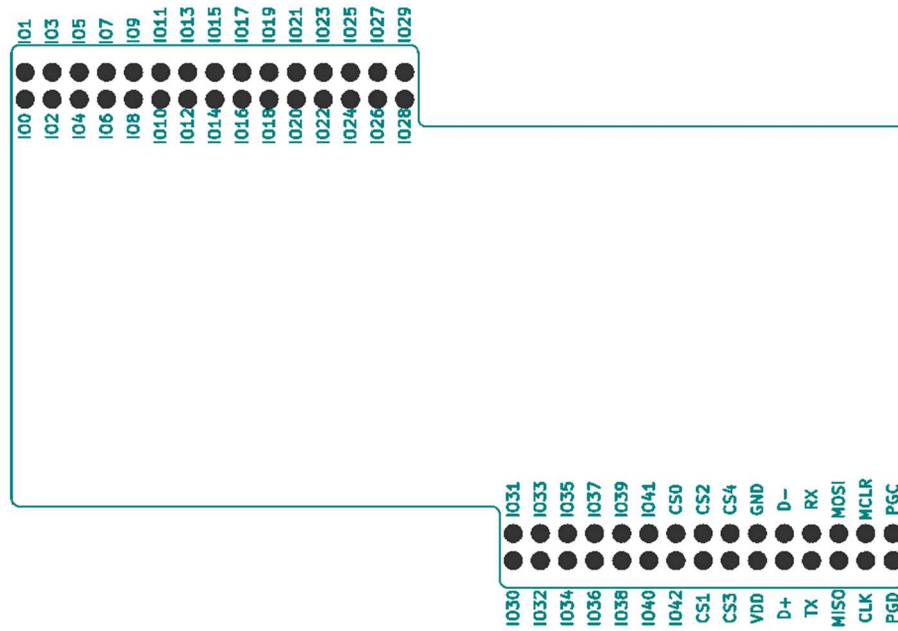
PIC Development Board Daughter Board Standard Drawings
